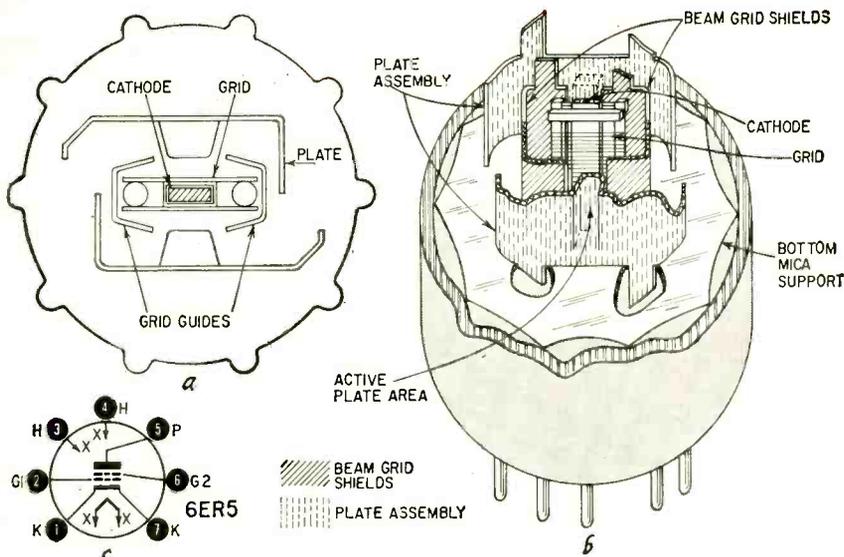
Cutaway diagram shows construction of the Guided-Grid tube.
